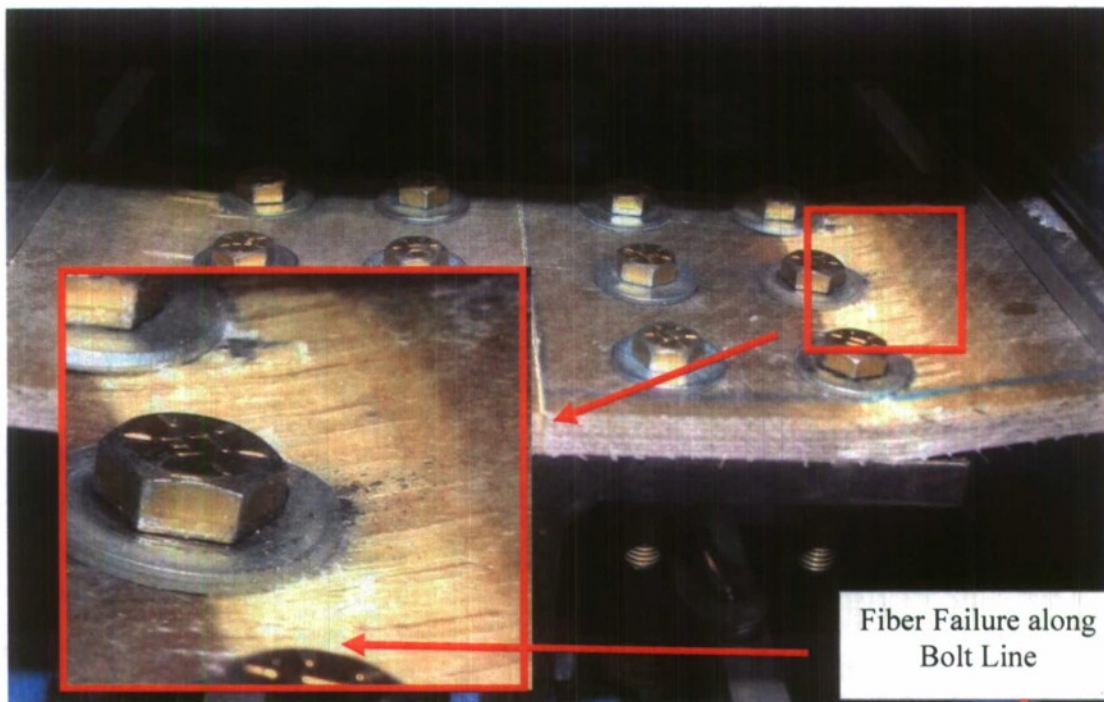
28-Ply Bolted Joint 7kip Fatigue Test 1 Failure Photo
